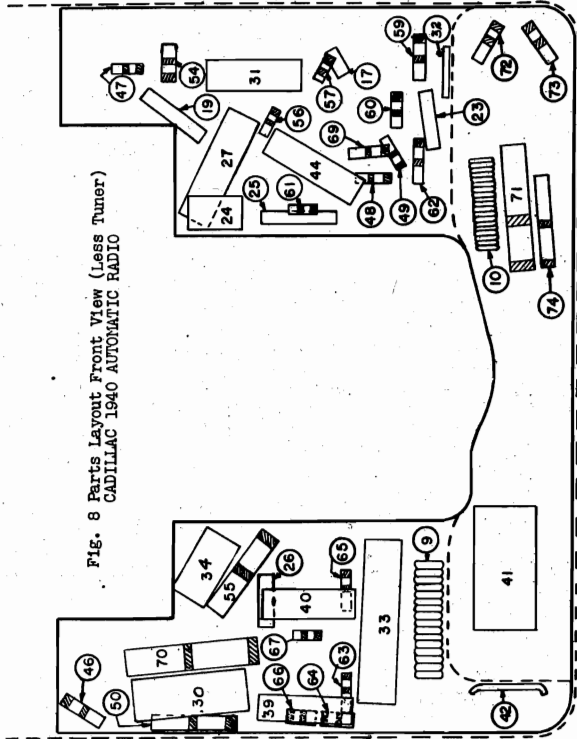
Parts Layout Front View (Less Tuner) CADILLAC 1940 AUTOMATIC RADIO
